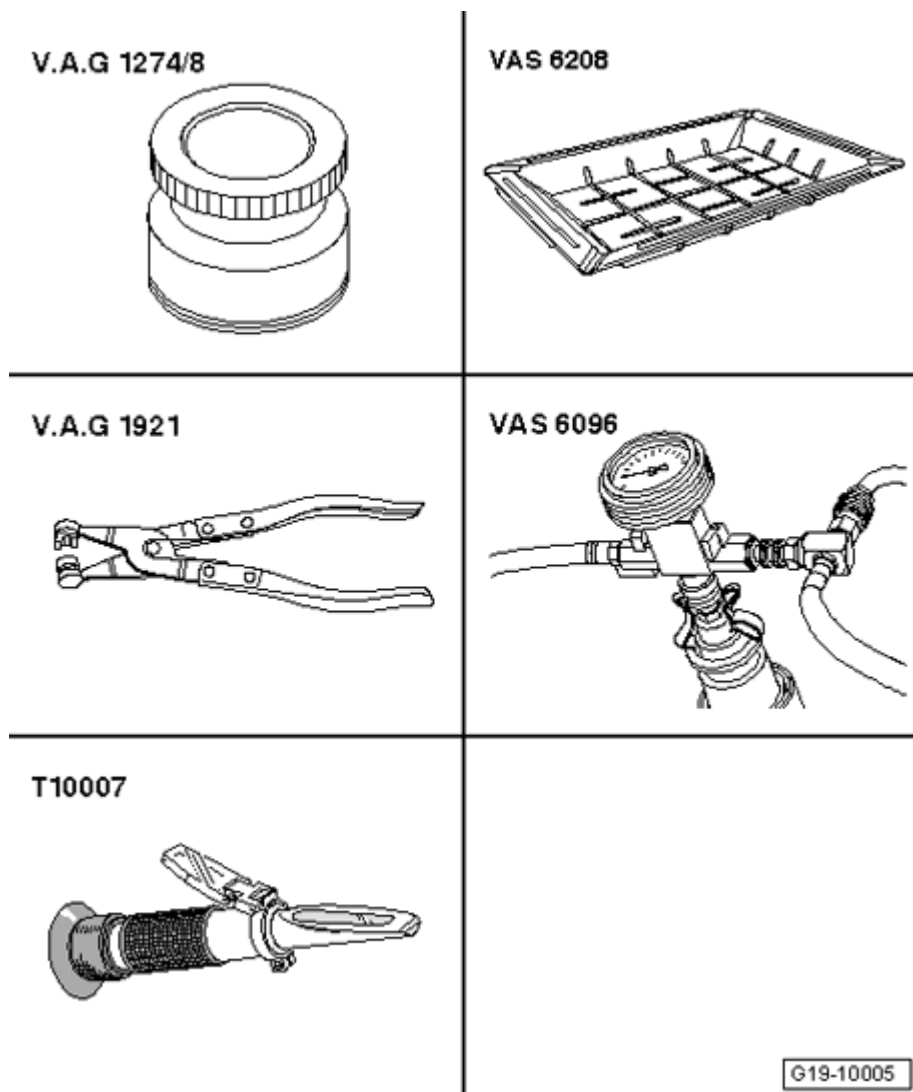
Identifying Special Tools - Cooling System, Draining And Filling
